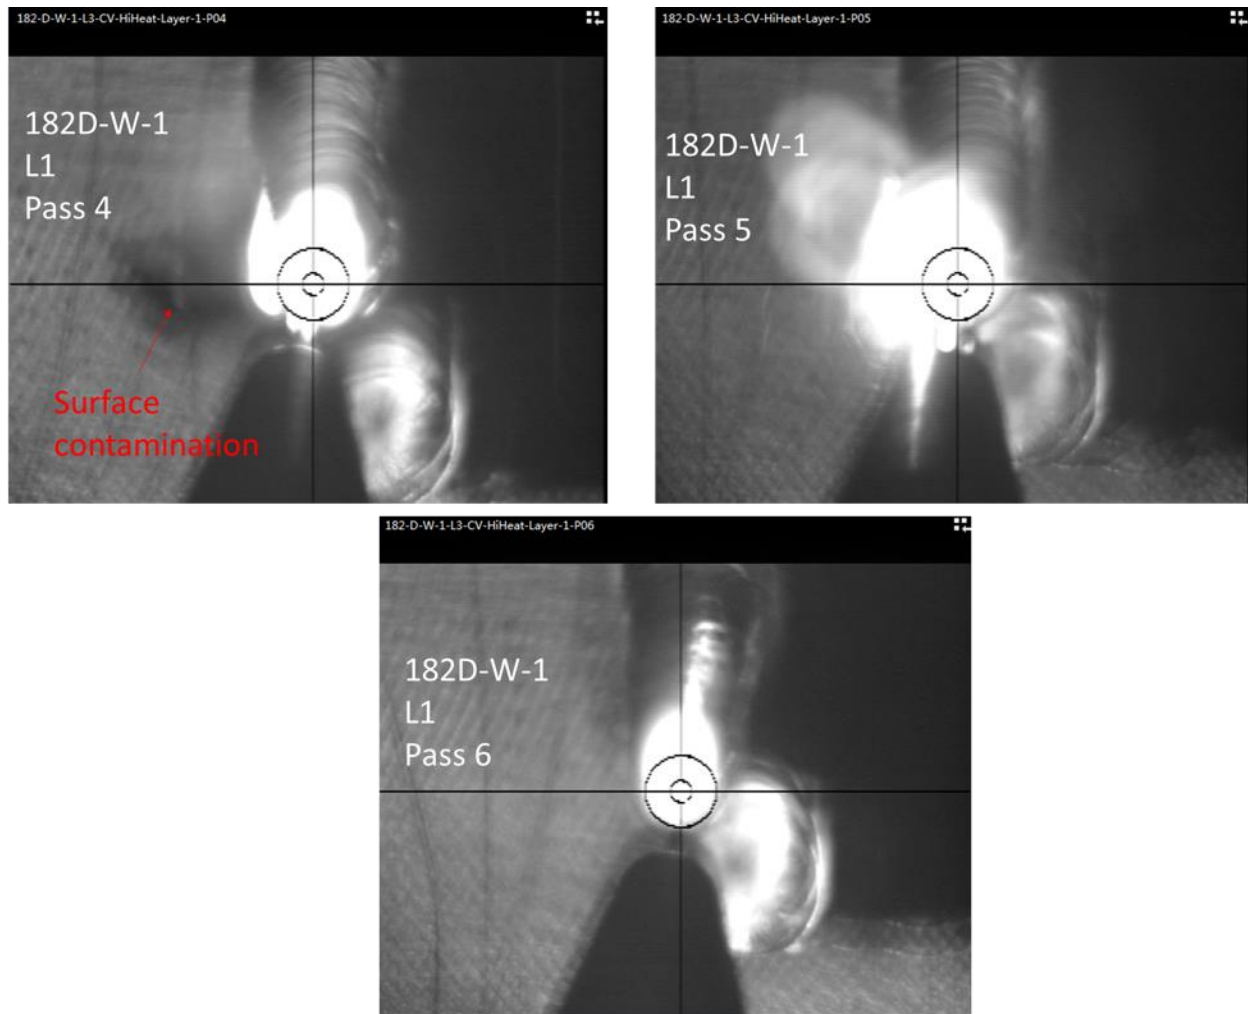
Unstable weld pool towards the end of weld passes 4-6 at the first layer of clad L1 on 182D-W-1 coupon due to surface contamination
